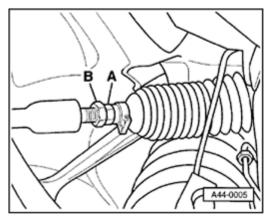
Identifying Lock Nut & Hex Nut Courtesy of VOLKSWAGEN UNITED STATES, INC.
